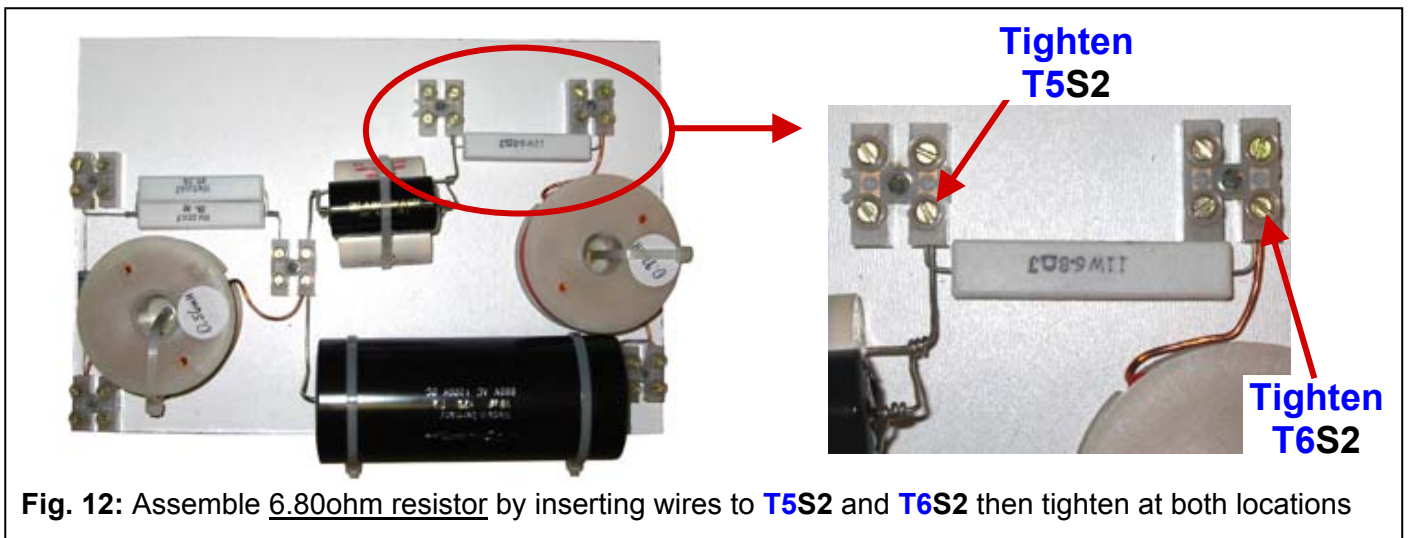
Assemble 6.80ohm resistor by inserting wires to T5S2 and T6S2 then tighten at both locations
